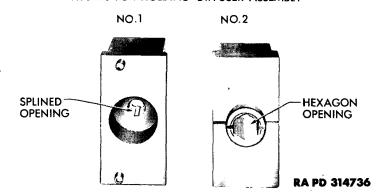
Mounting Fixtures for Overhaul of Diffuser Section 42. CLEANING.
